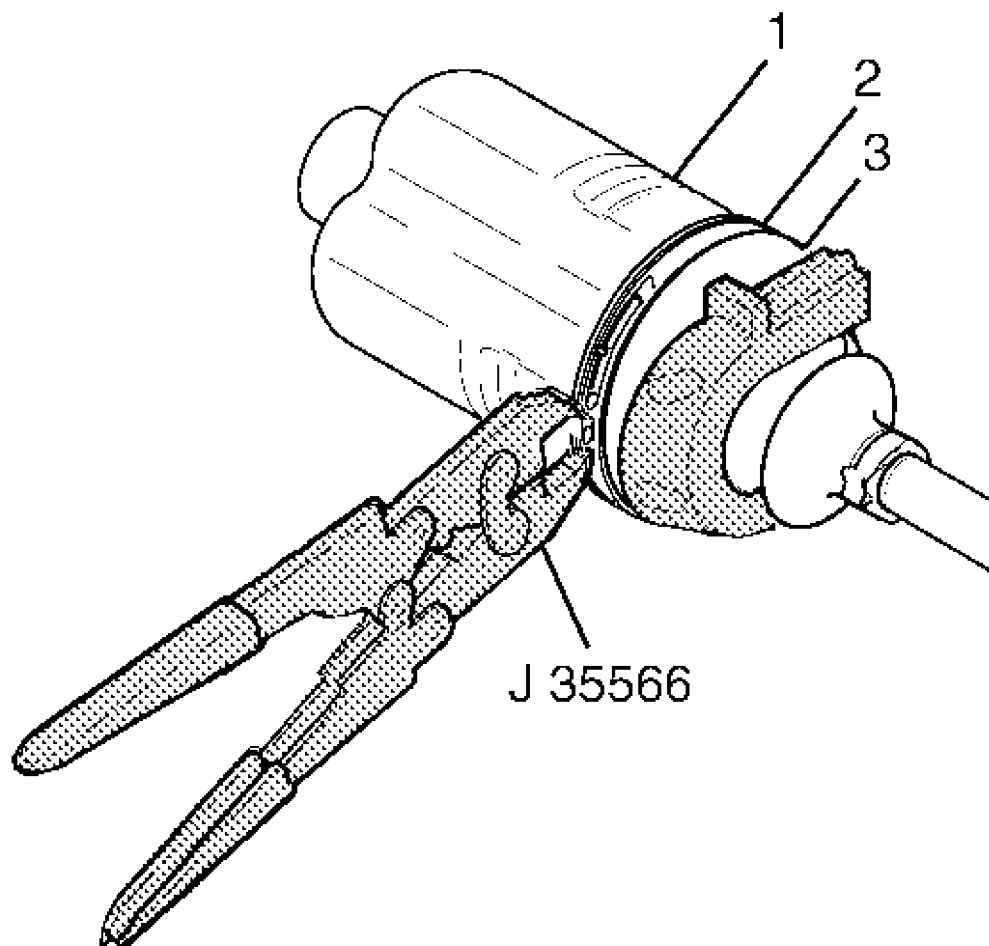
Securing Large Retaining Clamp & Boot To Housing
